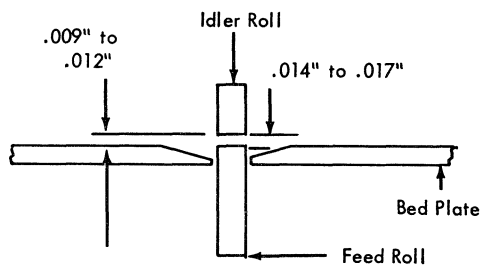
Auxiliary Feed and Idler Roll Adjustment
